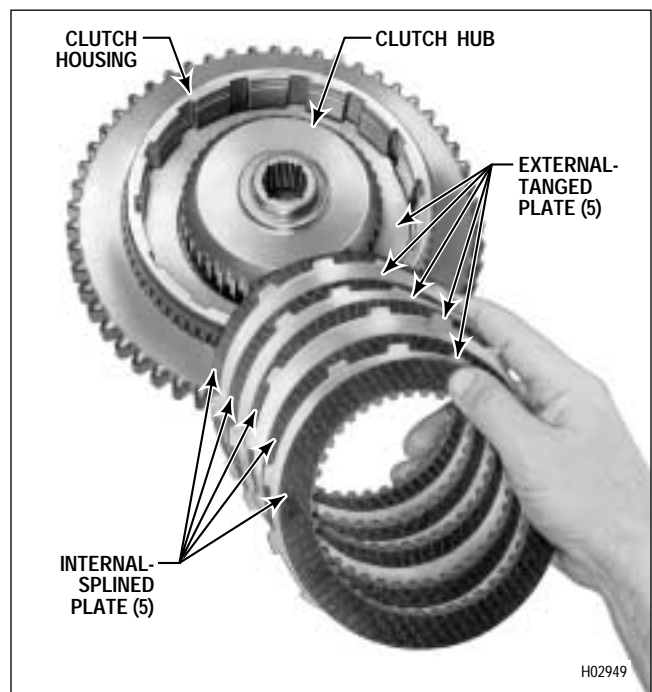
Installing Forward Clutch Plates (Models Without Wave Plate)
